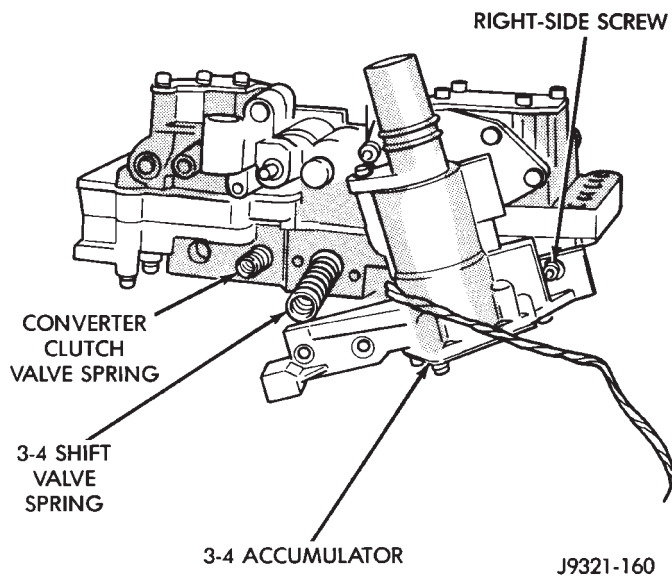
Converter Clutch And 3-4 Shift Valve Springs
